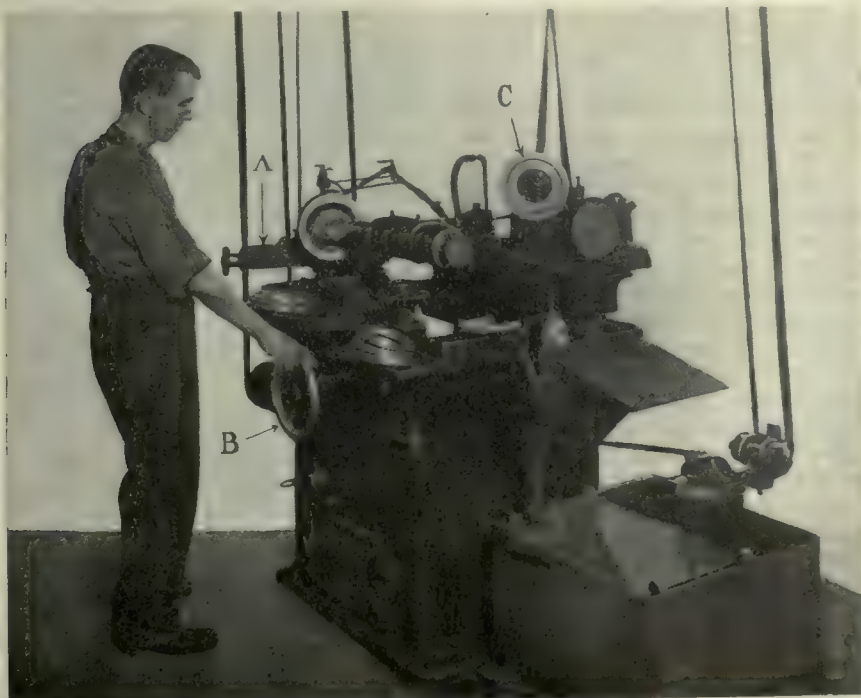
AUTOMATIC GRINDING MACHINE FOR FORMING CURVED SURFACES OF RACEWAYS.
